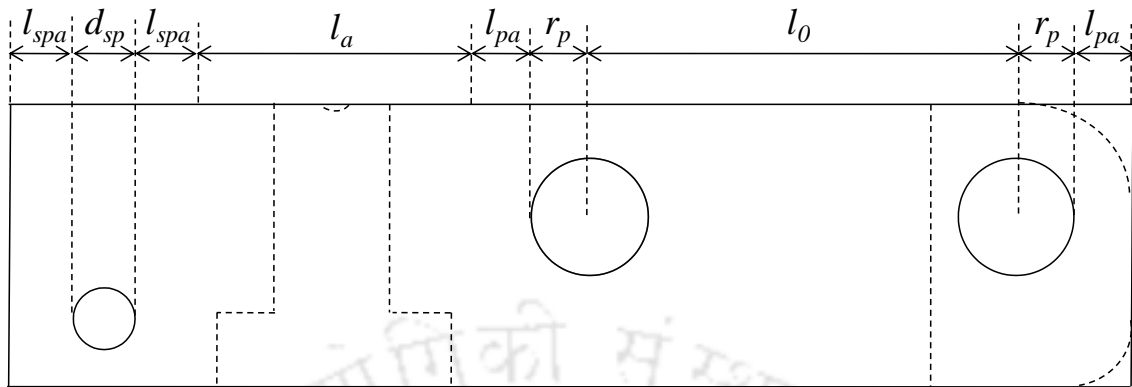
Different dimension and clearance of right hand view of the top part of the knee joint
